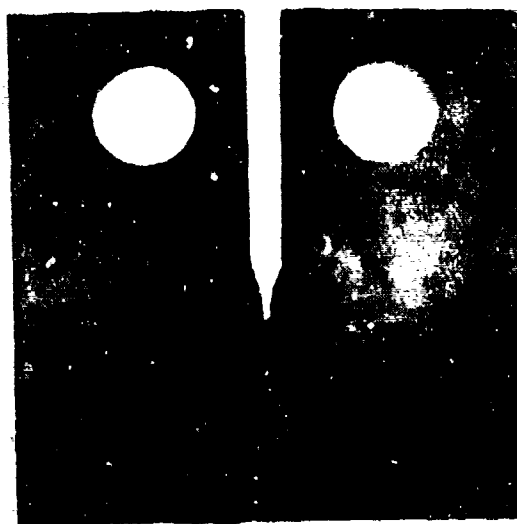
Failed D6AC fracture toughness (compact tension) specimen. The specimens were laser hardened at the crack tip on both sides.
